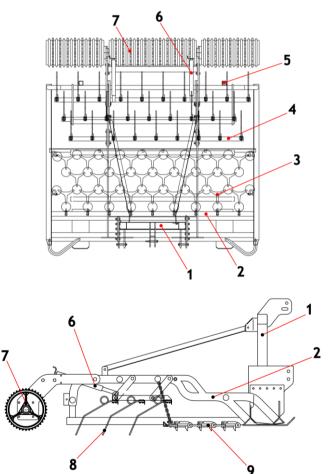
HYBRO weeder harrow (3m version with MCB roller) (1 - drawbar, 2 - frame, 3 - cast iron smoothing harrow, 4 - weeder section, 5 - support feet, 6 - adjustment cranks; 7 - MCB roller, 8 - spring tine, 9 - cast iron)
